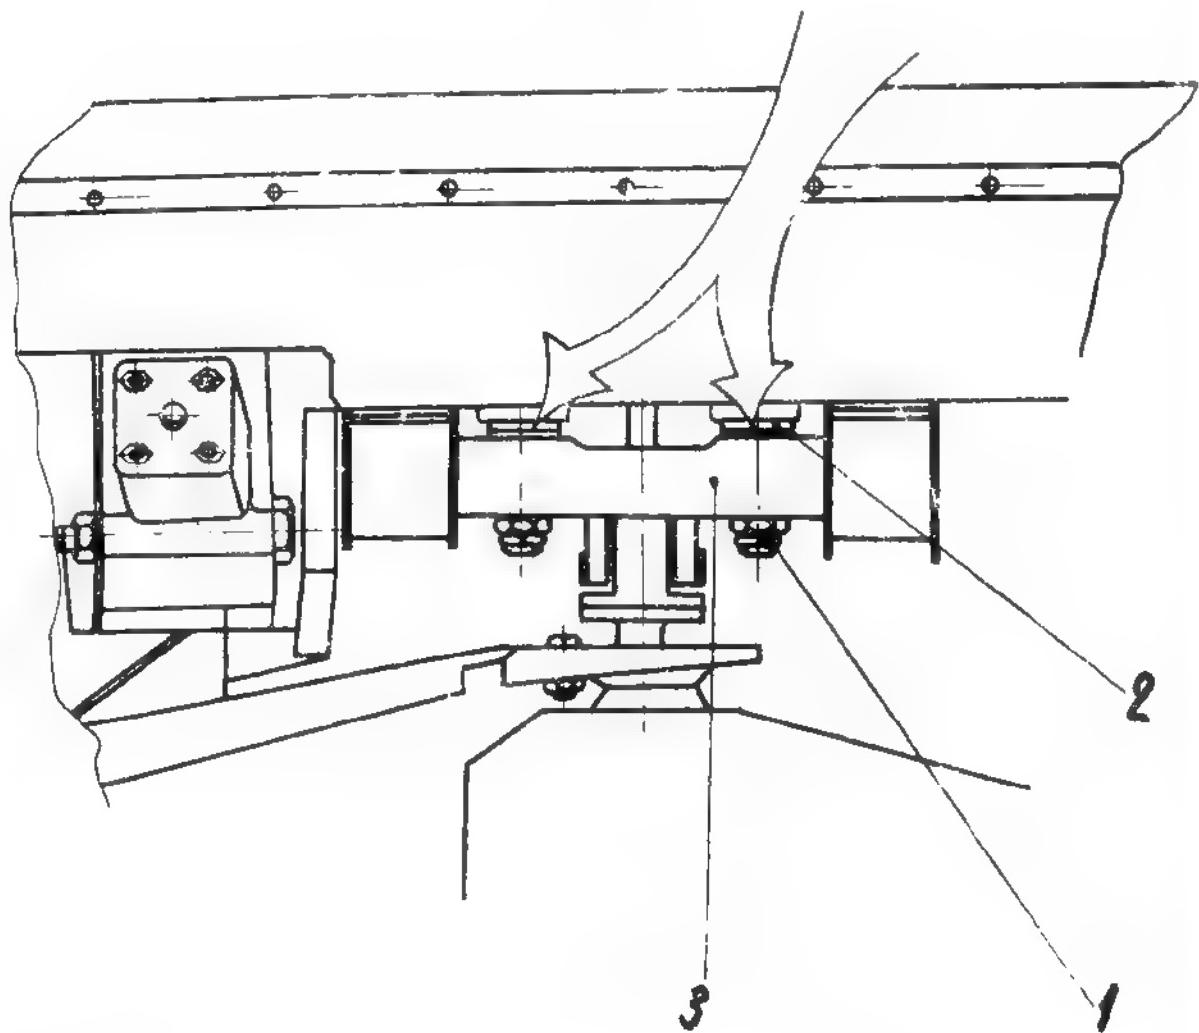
ADJUSTING CAMBER & CASTER ANGLE
